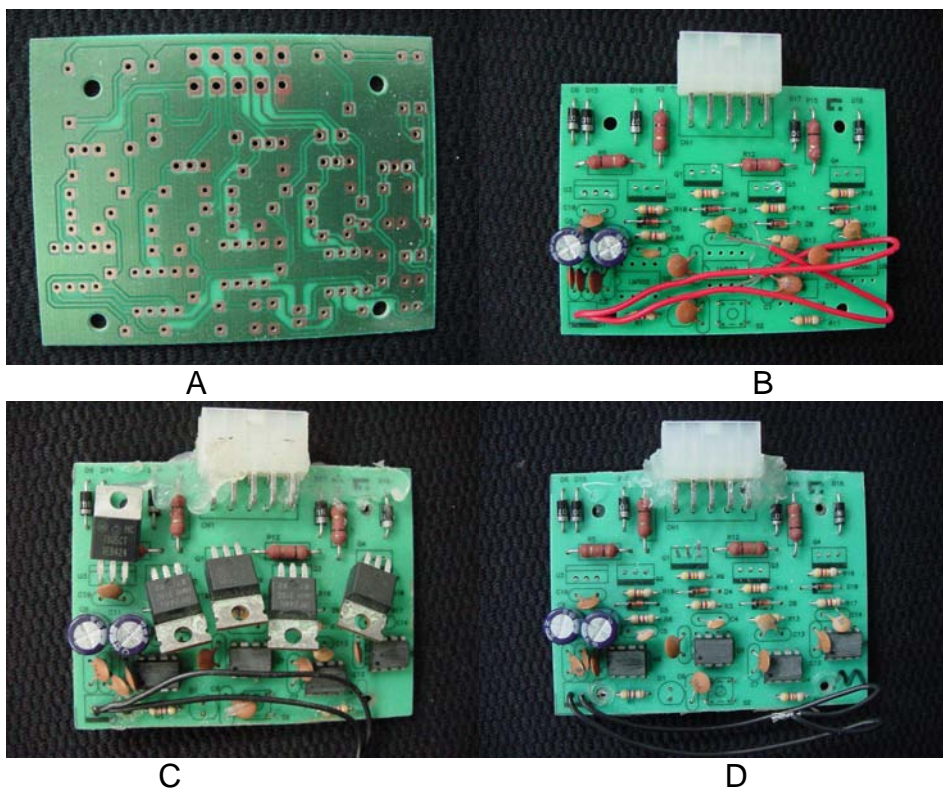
Printed circuit boards. A: Nude; B, C and D: Assembled.
